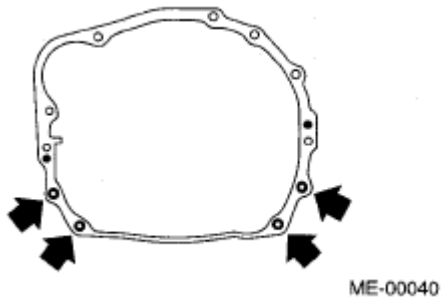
Identifying Lower Side Of Transmission Fastener Location
